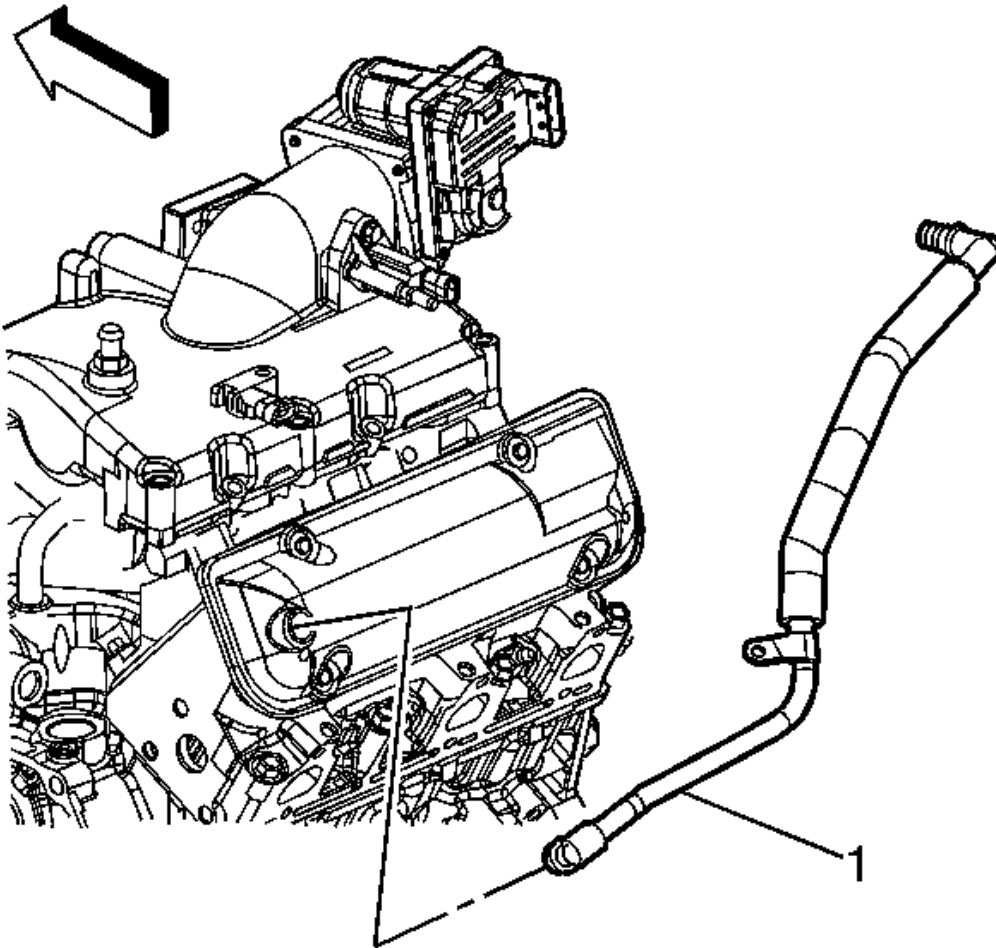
Identifying PCV Fresh Air Pipe At Valve Cover
